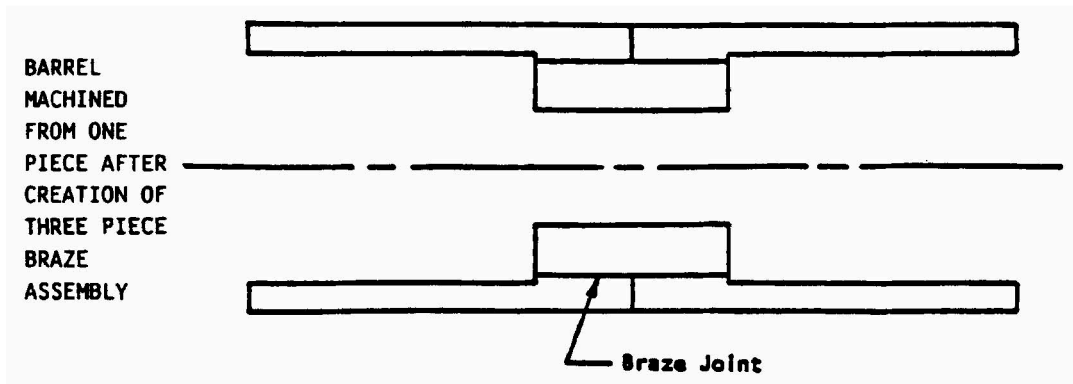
Three Piece Assembly Rip-Stop Configuration
